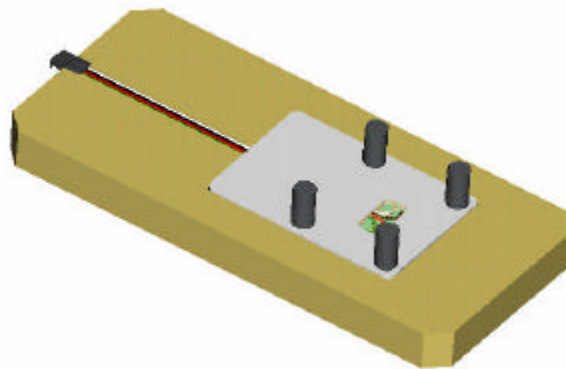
Assembled View of Tooling Configured to Stake PIN Diode Leads
